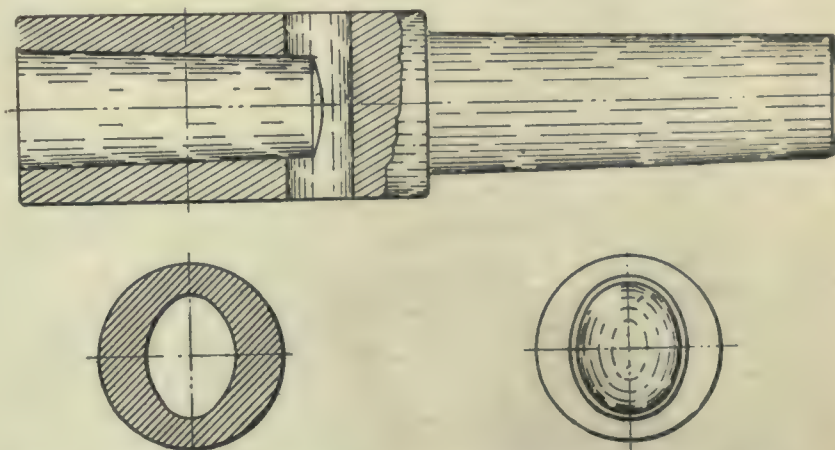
Oval Taper Socket Showing a Section Through Socket at Line and End View.
